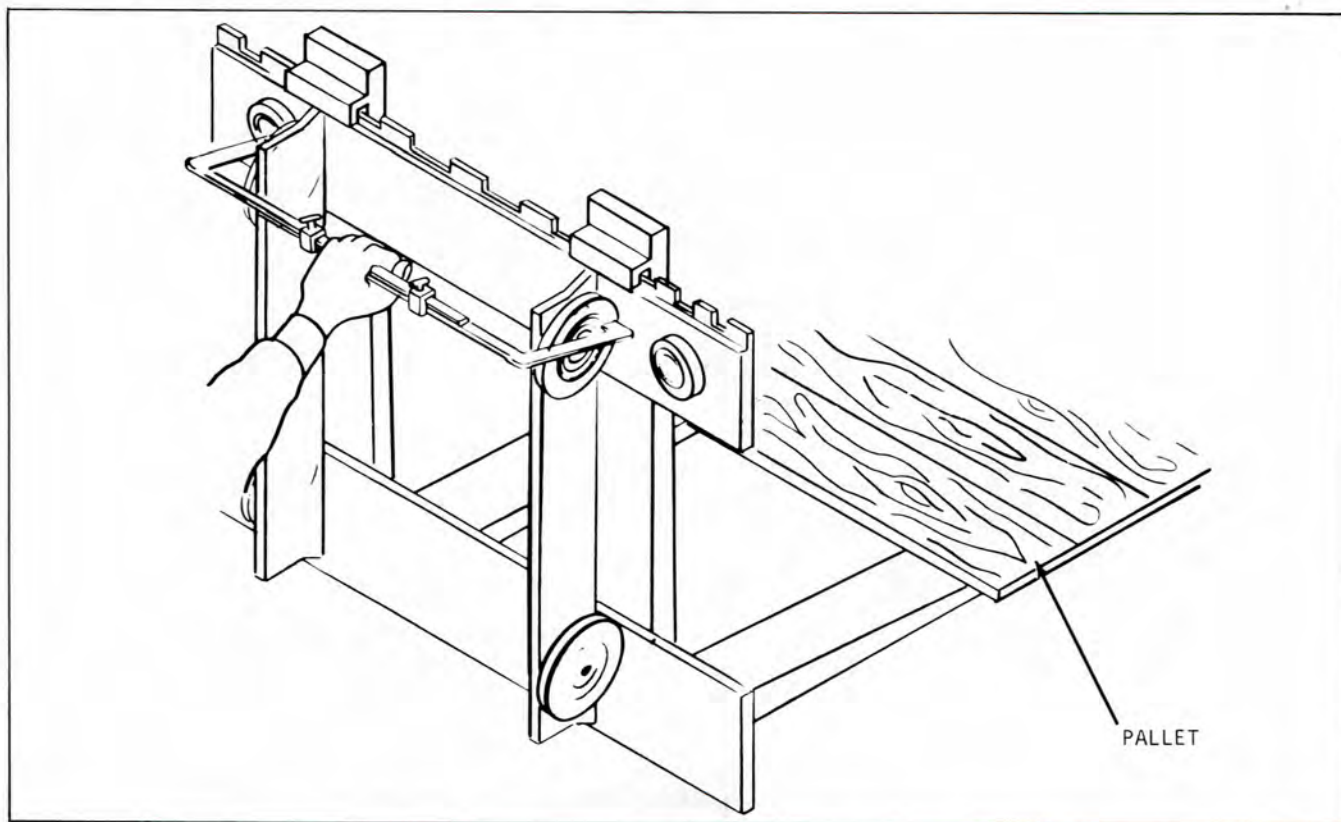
Spanning Upper Rollers (Four Roller Carriage)
